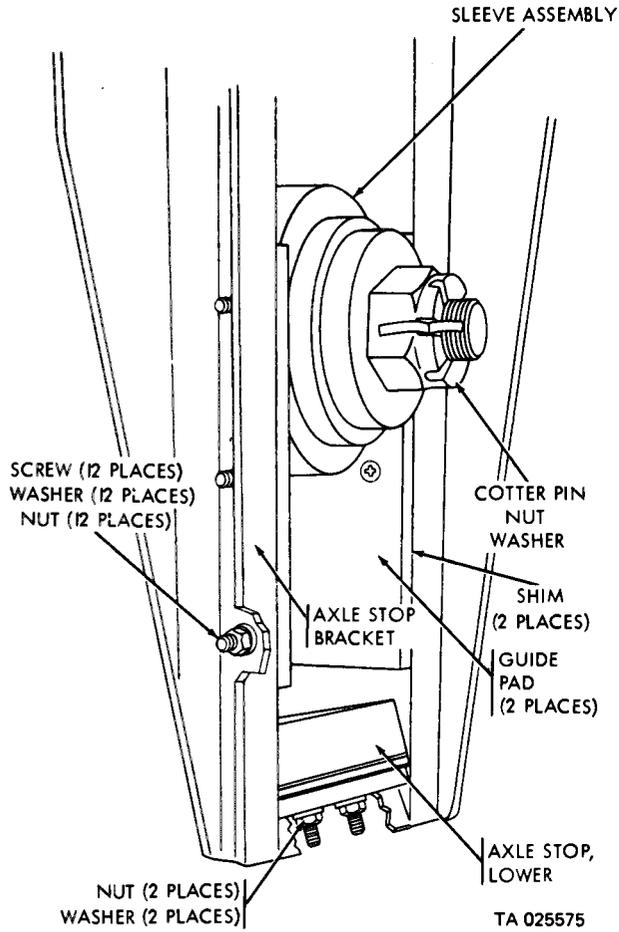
Lower axle stop and guide pads (semitrailer No. 1 through 200).
